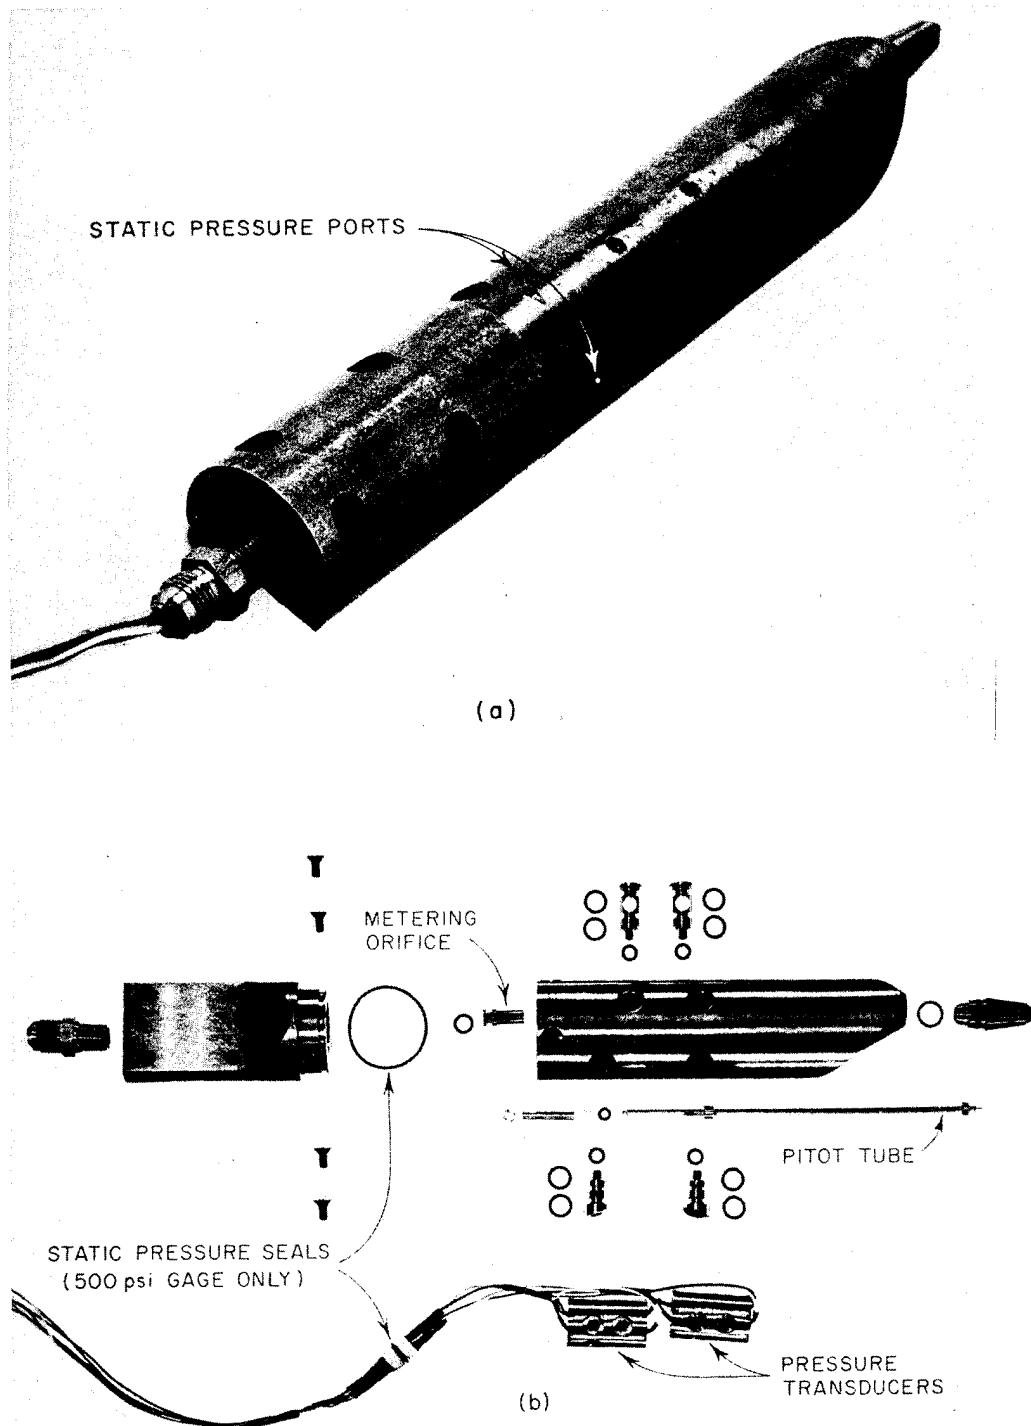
SRI-MAD gage: (a) assembled gage and (b) gage components.
